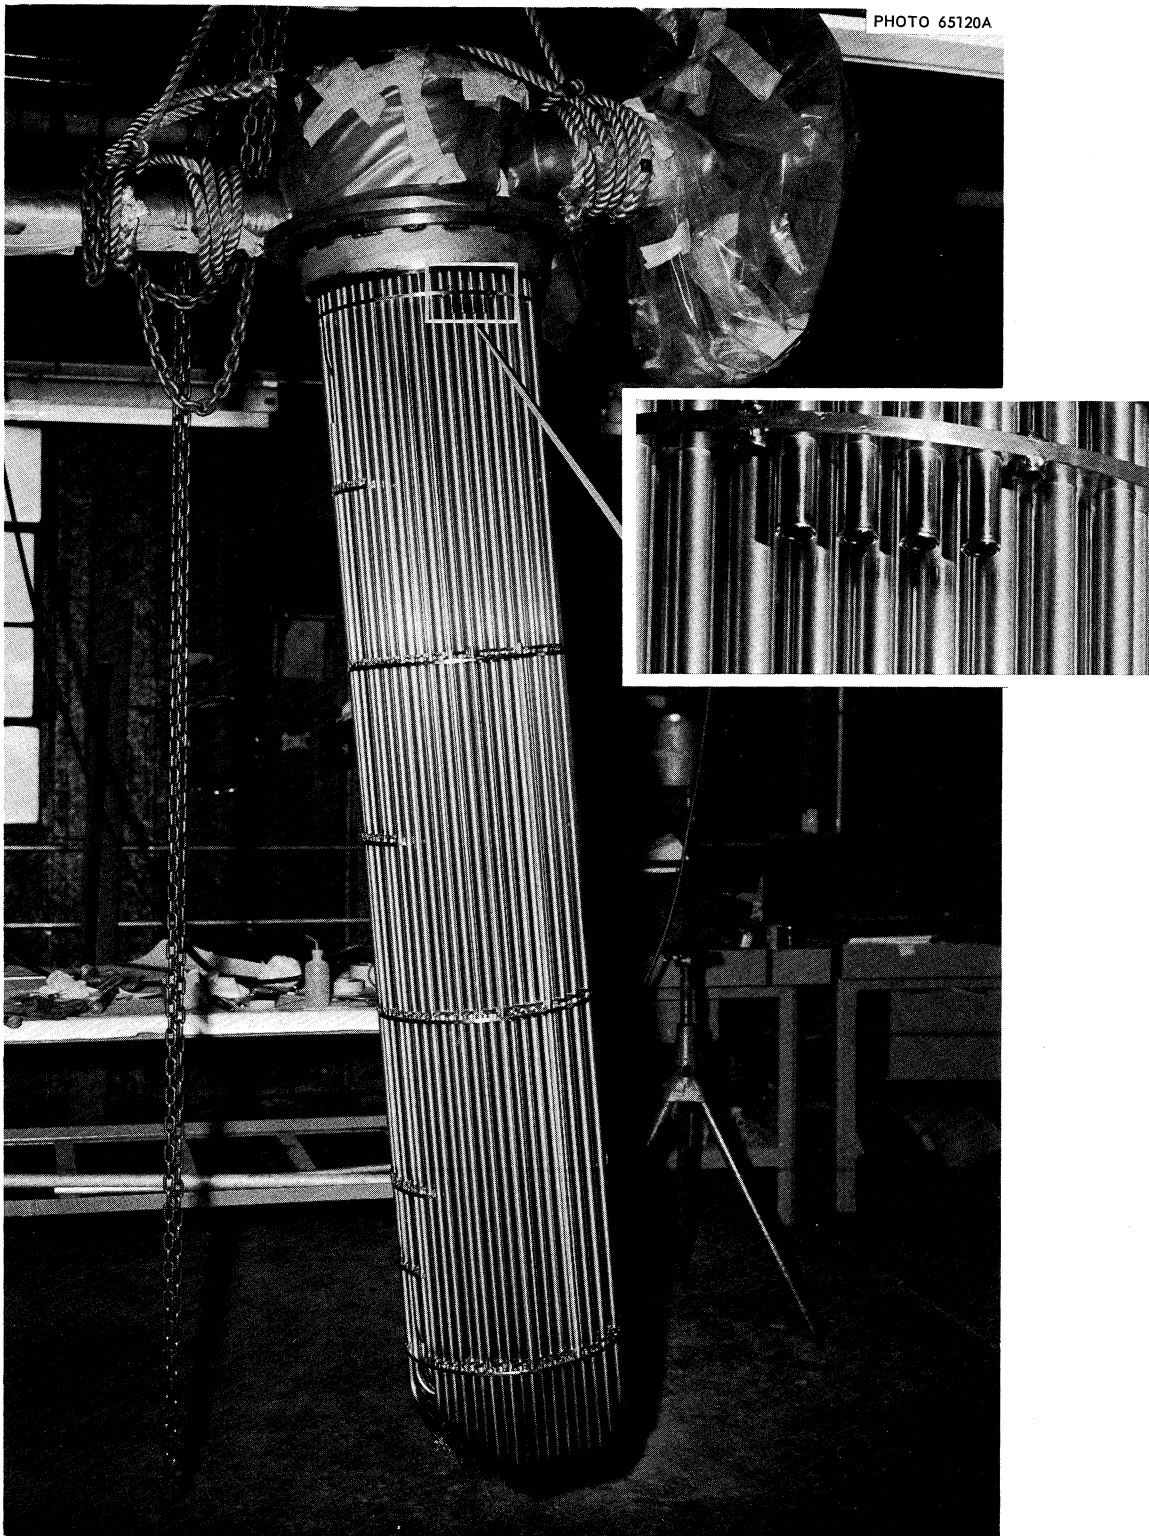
Four of the Sealed Tubes Inverted from Welding Position (See Inset).
